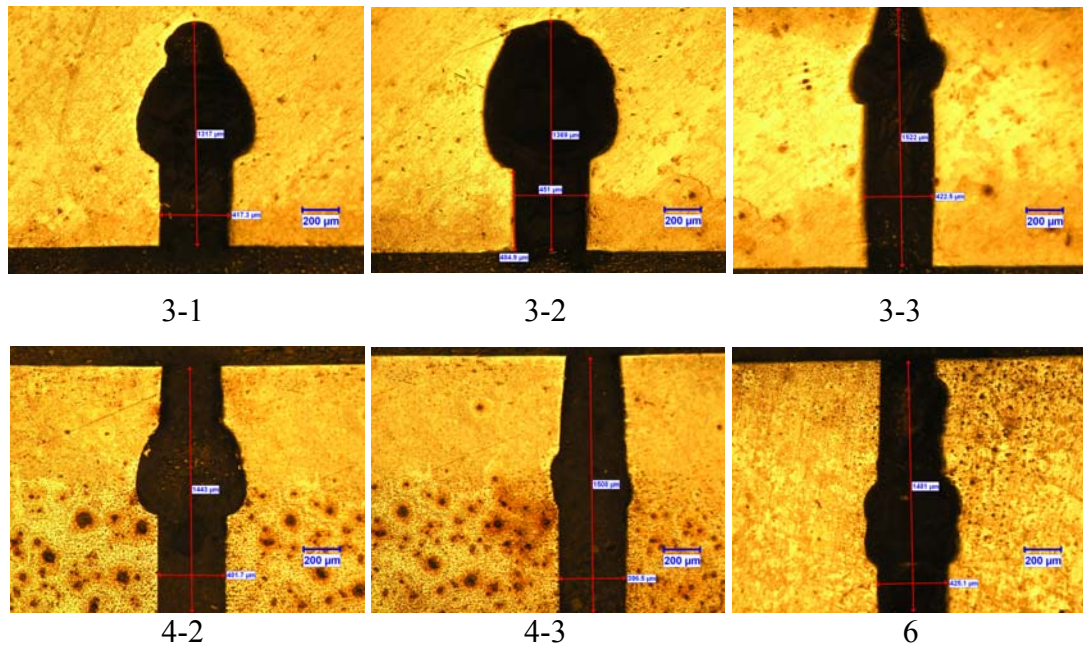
A series of hole machining defectively (numbers assigned to each pictures are given considering total machined holes as given in Appendix F)
